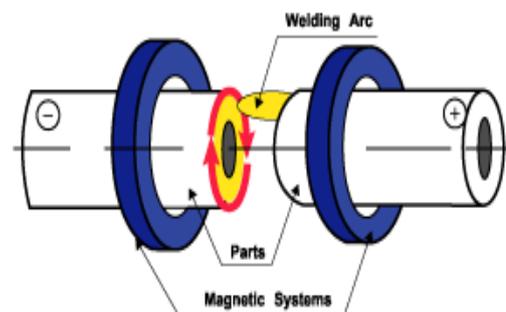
Two pipes are set coaxially in MIAB welding
